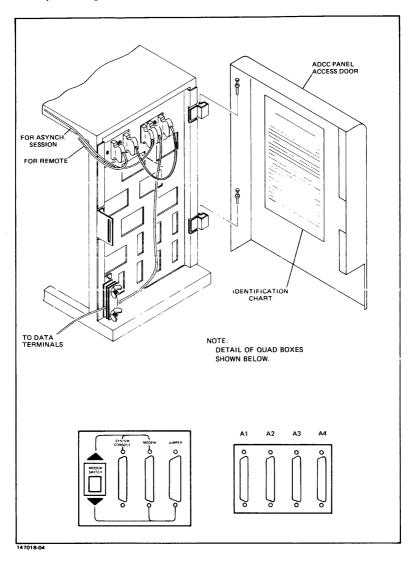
Processor Terminal Panel and RS-232-C Cable Routing (Series 33)
